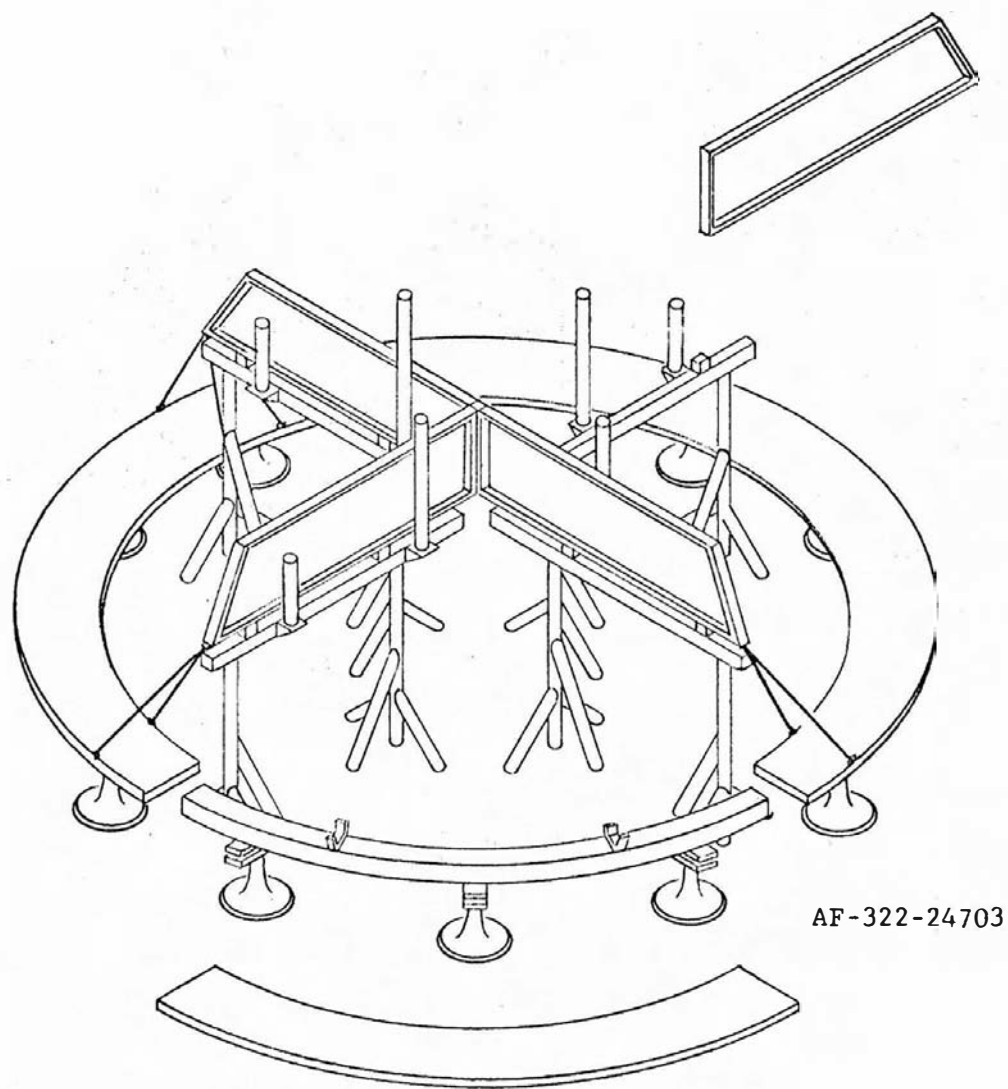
Cruciform and Cantilever Ring Baffle Assembly
